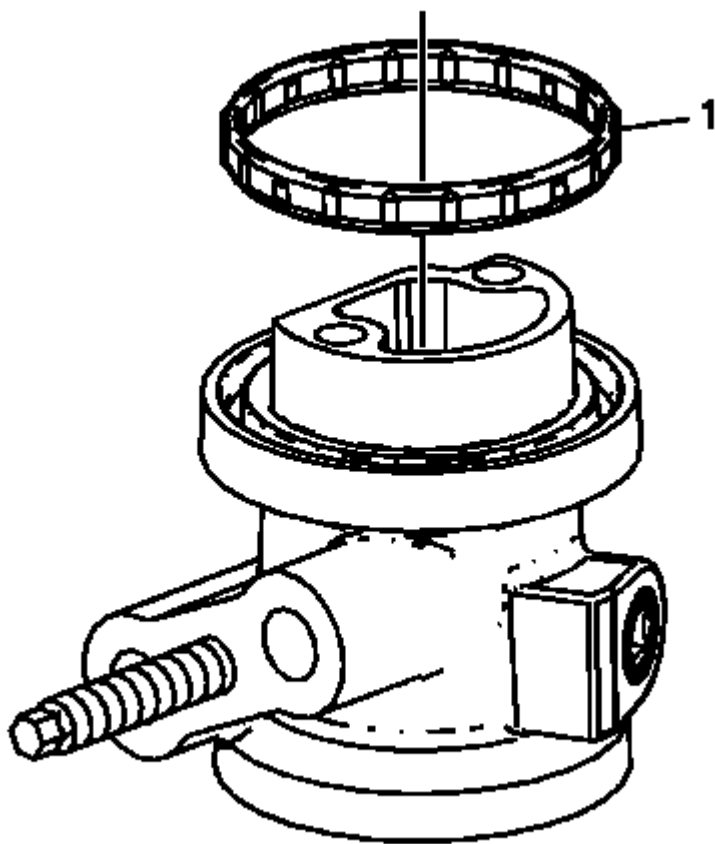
Identifying Oil Filter Adapter Seal O-Ring
